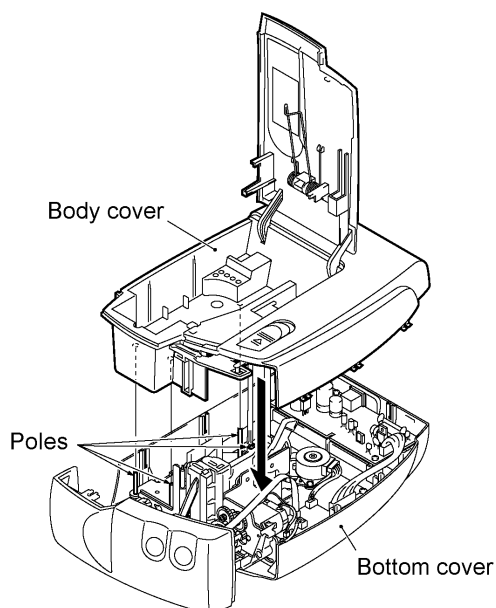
Fitting the Body Cover and Bottom Cover Together
